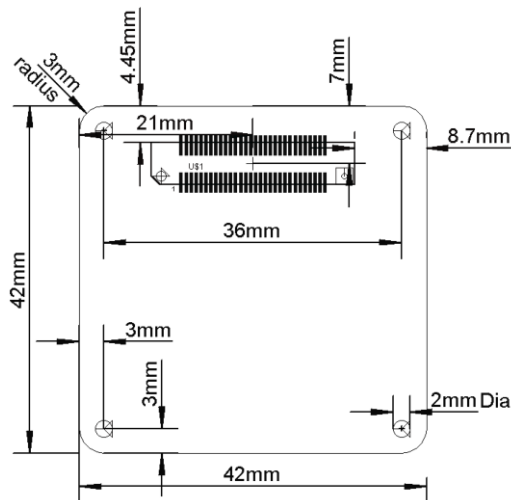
The internal PCB dimensions according to the PQ60 standard (source: [38])
